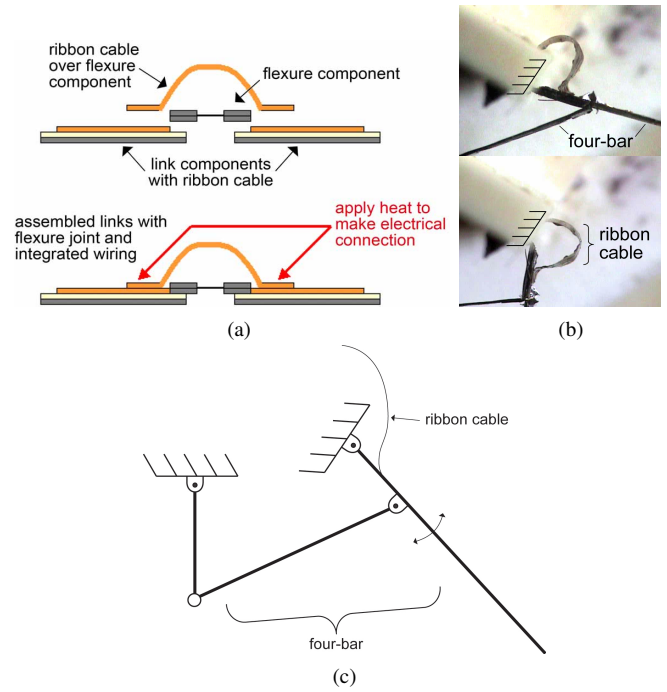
Components and assembly method to integrate wiring over the flexure joints (a). In (b), a complete ribbon cable is integrated with a four-bar mechanism (illustrated in (c)) and actuated through a large displacement ($\approx 90^\circ$) as a proof-of-concept.
